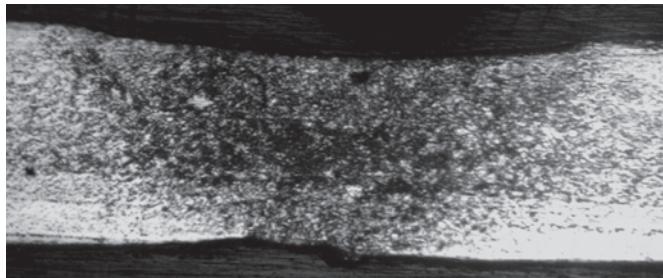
Macroscopic structure [Nital 2%-100X] (pulsed laser welded Zn coated thin metallic sheets).
